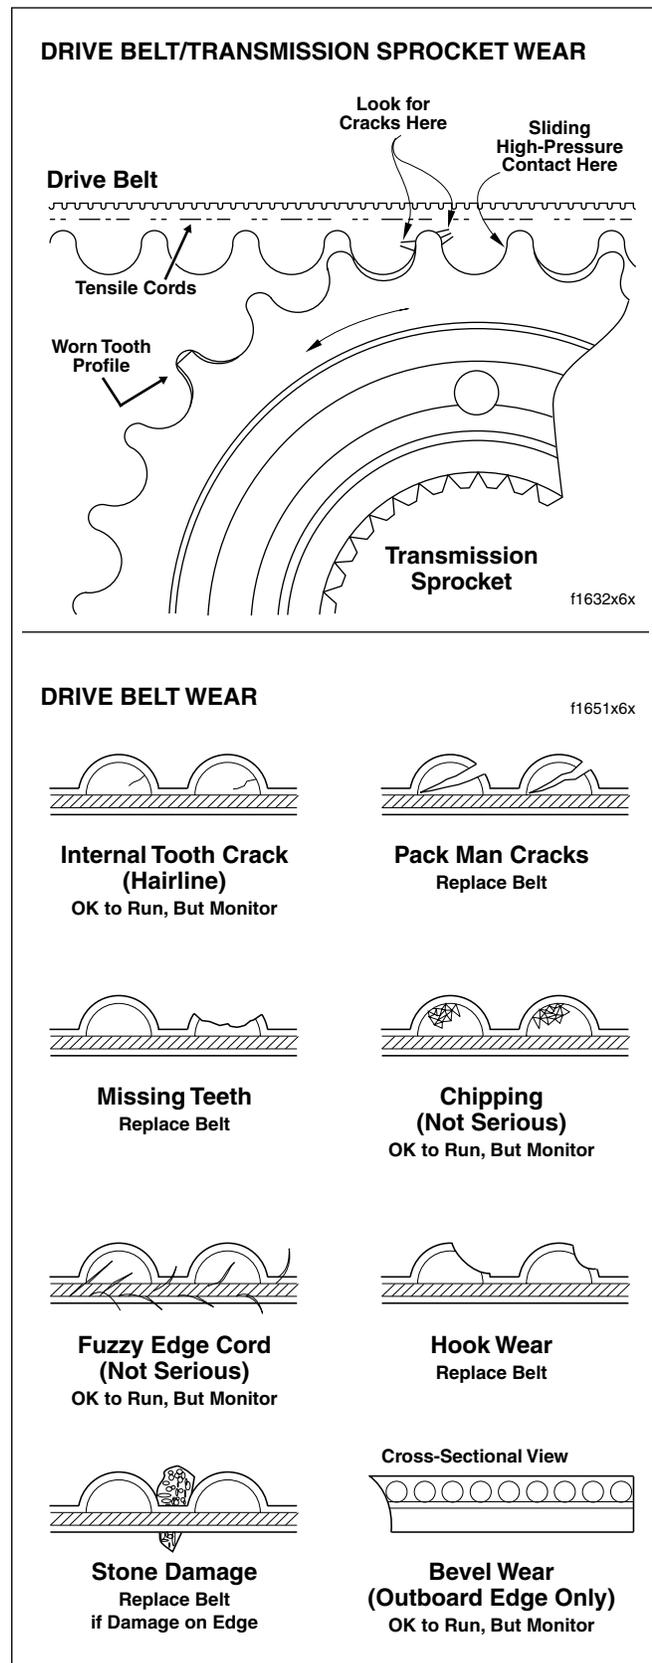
Drive Belt/Transmission Sprocket Wear
